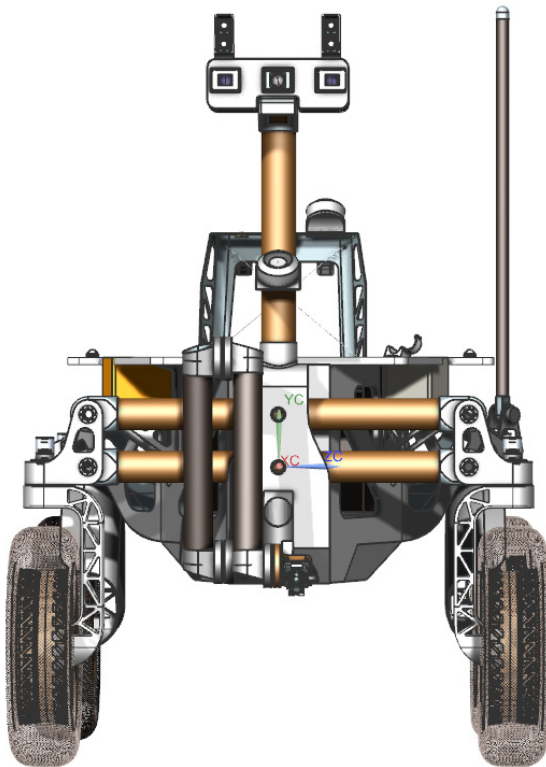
Front view of the rover showing the camera head and robotic arm.
